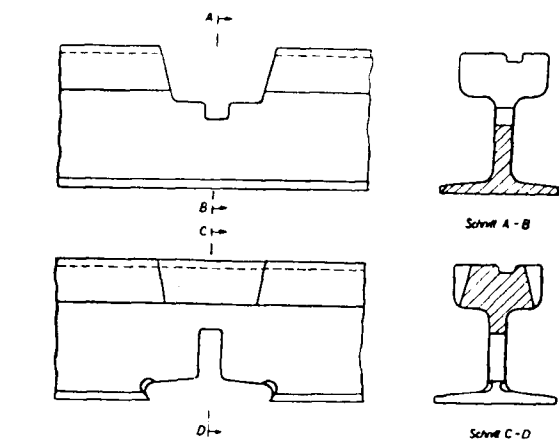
Welding preparations at a junction of heavy web rails
